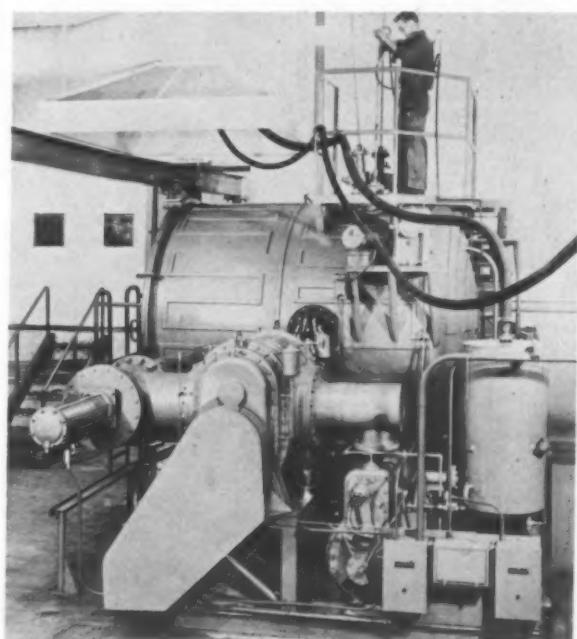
Vacuum system for 2200 lb uranium vacuum melting furnace which can be used for conventional bottom pouring or tilt pouring ladles. Chamber is of 8 ft inside diameter and 9 ft long. Melting power is 300 kw.
